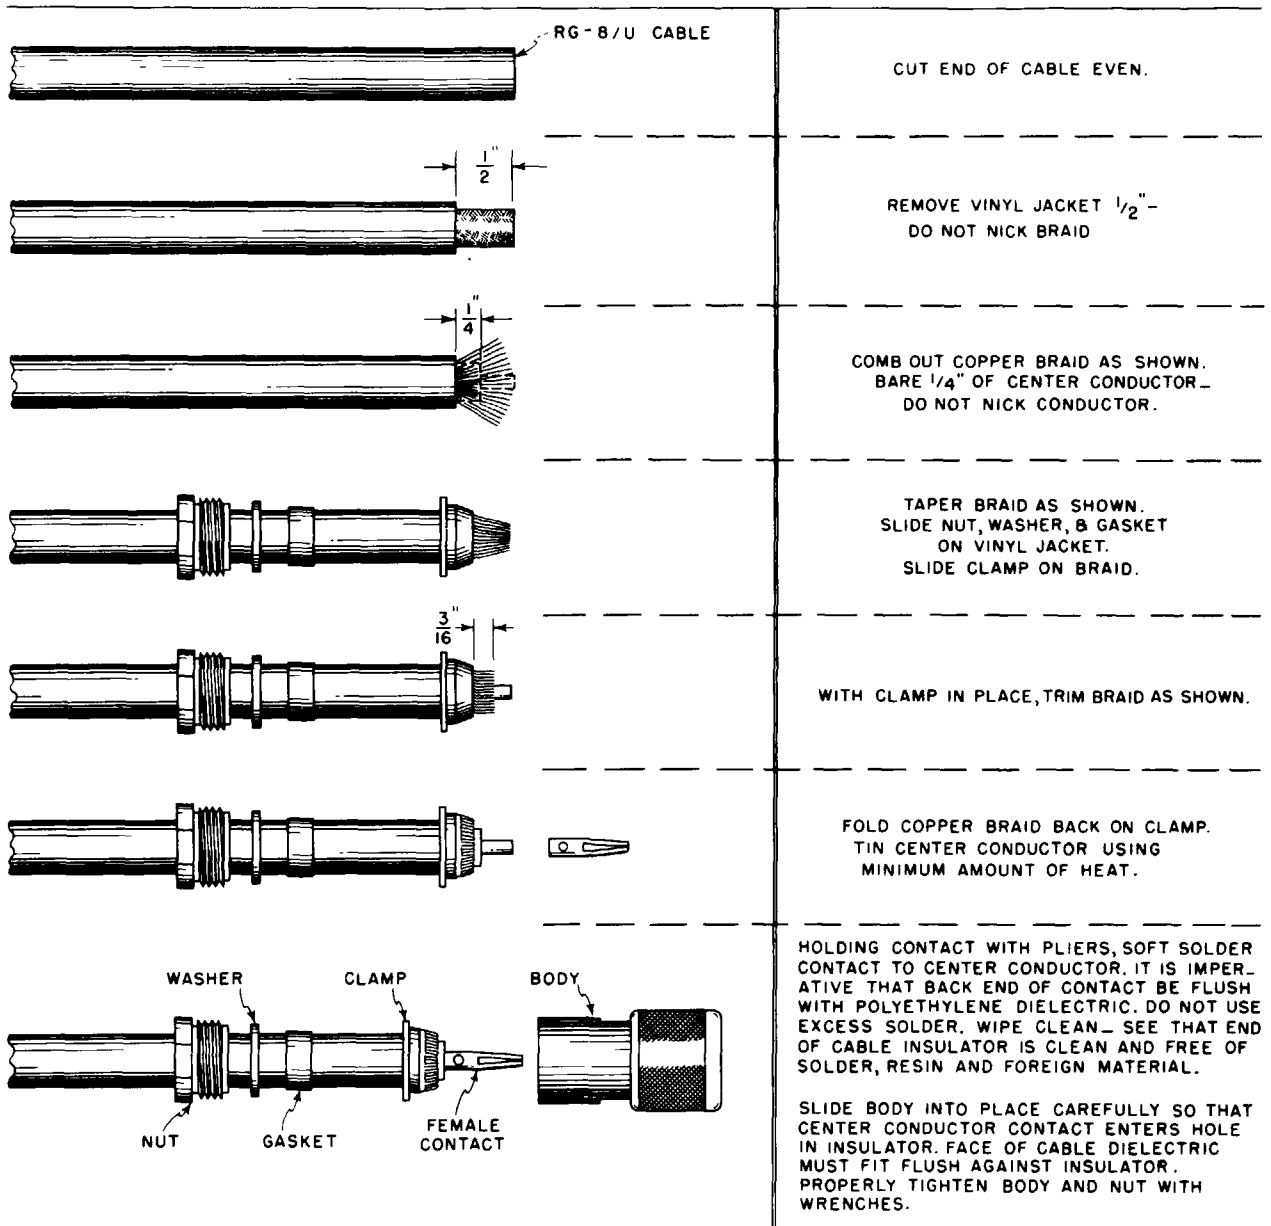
Assembling Plug UG-21B/U to Cable RG-8/U, Procedure
